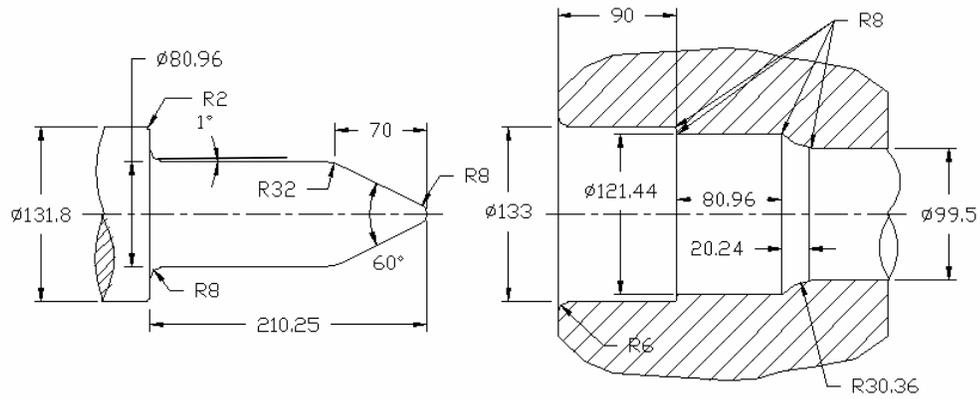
Header tool and gripper die of 3rd stage [3]
